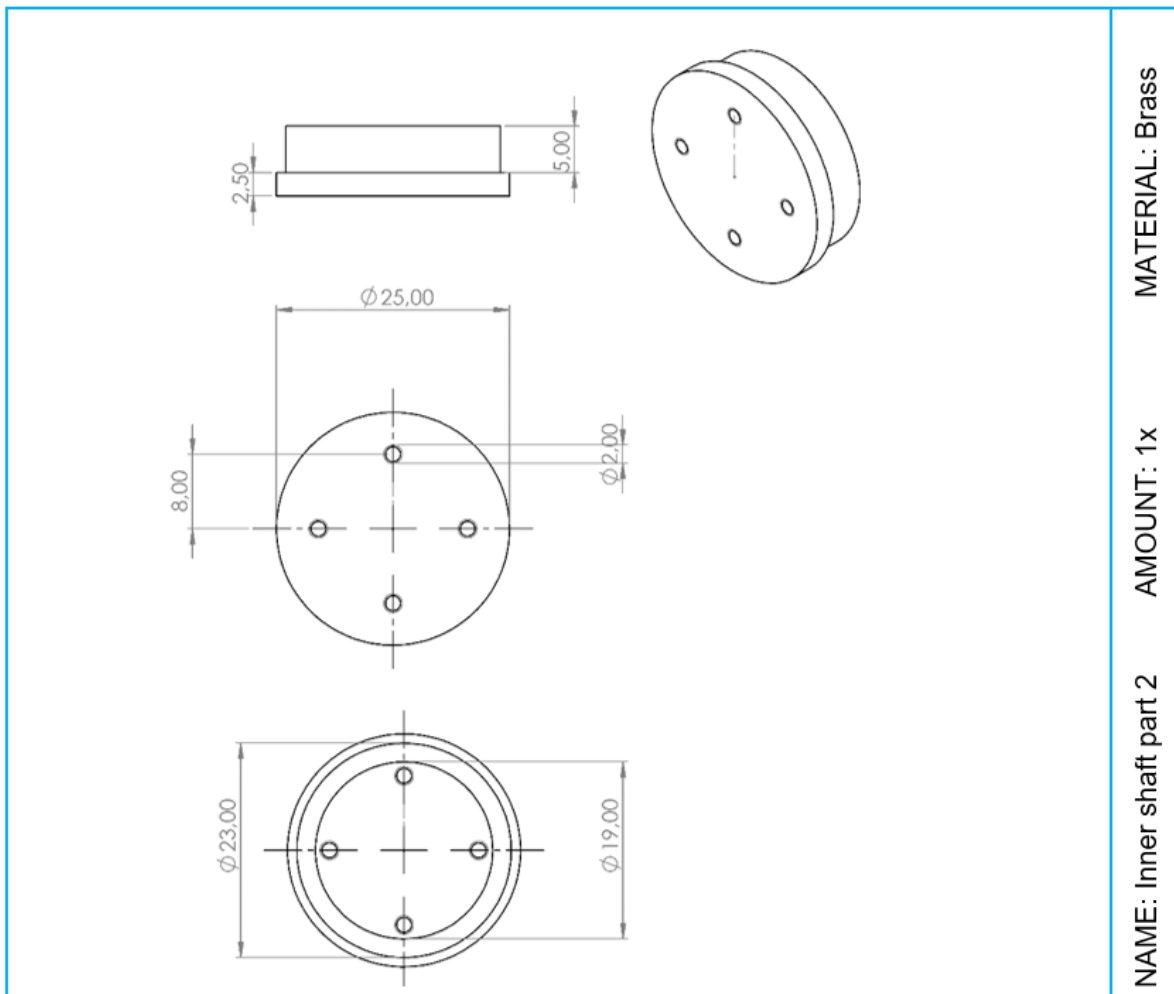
Construction drawings of the inner shaft part 2 - Machined prototype
